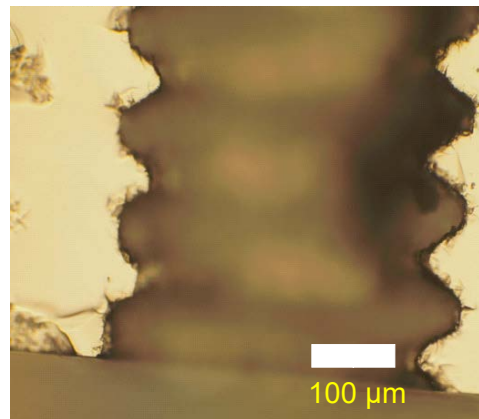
Cross section of an internal thread fabricated in a glass slide.
